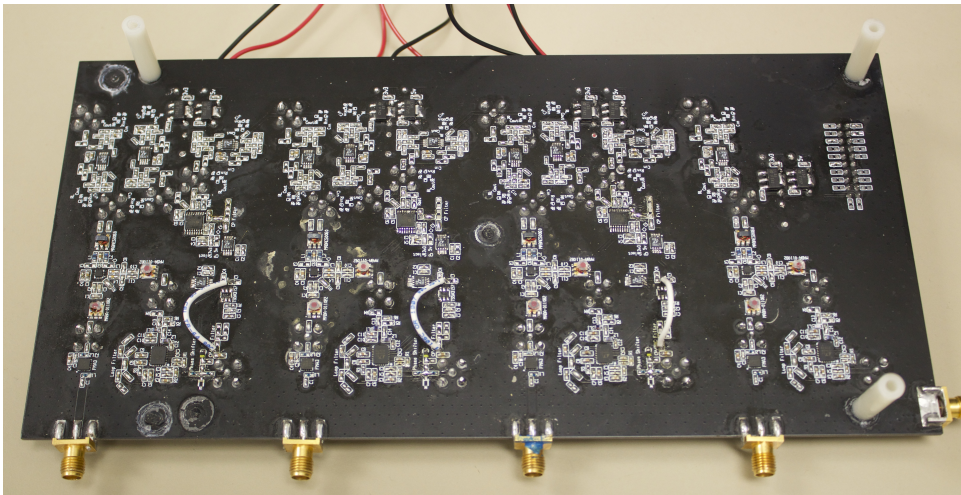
Assembled DLL-HPC received signal beamformer PCB - component side
